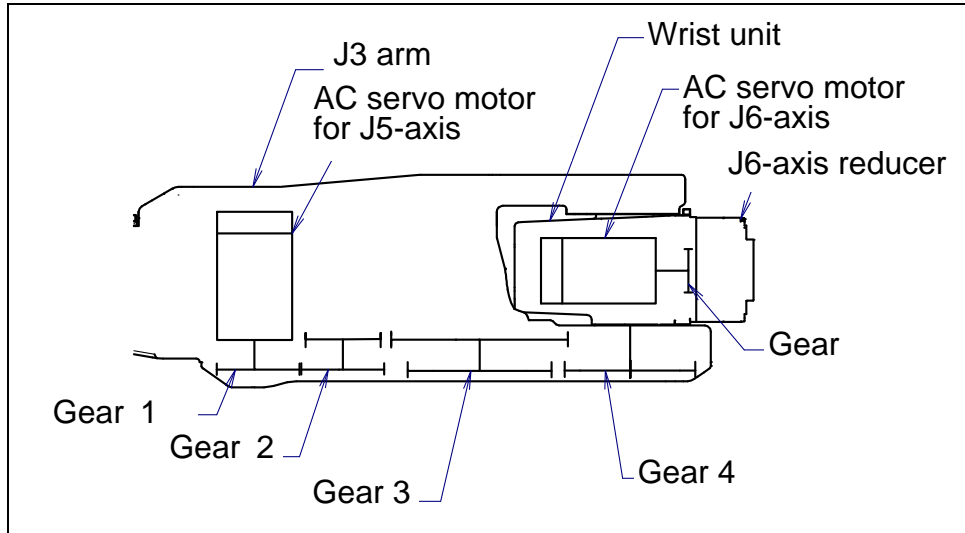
(e) Drive mechanism of J5/J6-axis
